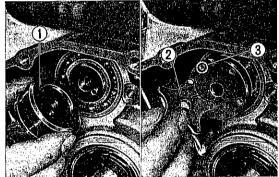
1 Drum gearshift center 2 Drum stop cam plate
